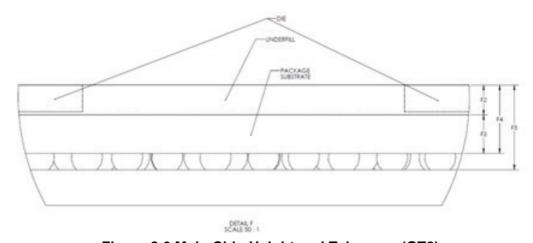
Main Chip Height and Tolerance (GT2)
